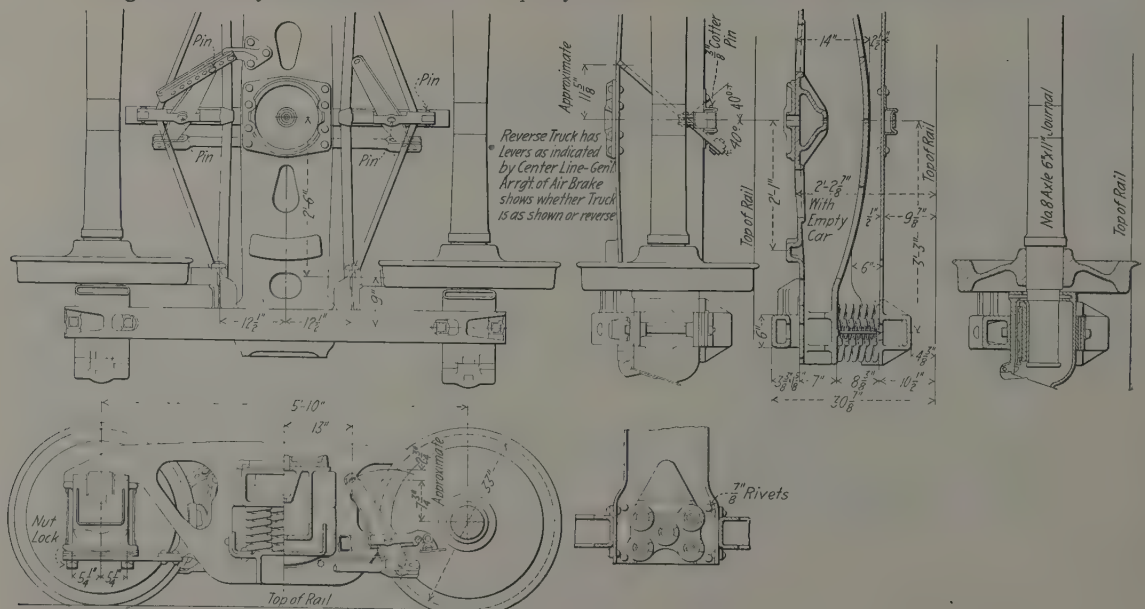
A—Pennsylvania Railroad 70-Ton Capacity Truck with Crown Cast Steel Side Frame.
